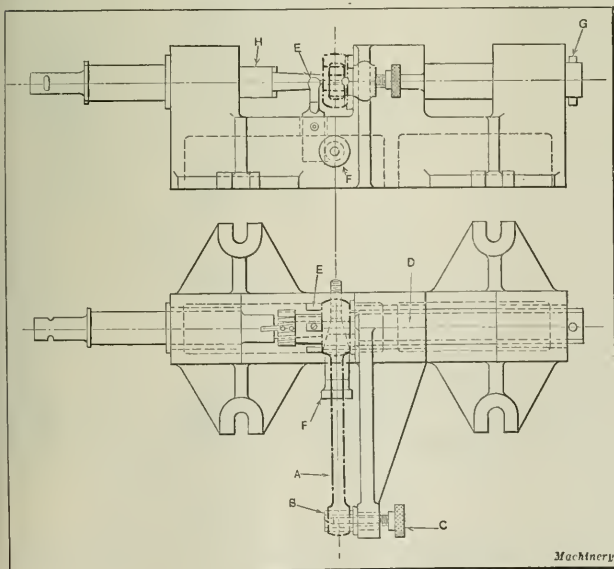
Boring and Reaming Fixture for Connecting-rod Bearing
